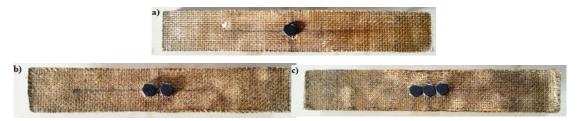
Number of holes in the specimen along horizontal axis is filled with M6 bolt and nut; (a) 1 bolt, (b) 2 bolts and (c) 3 bolts
